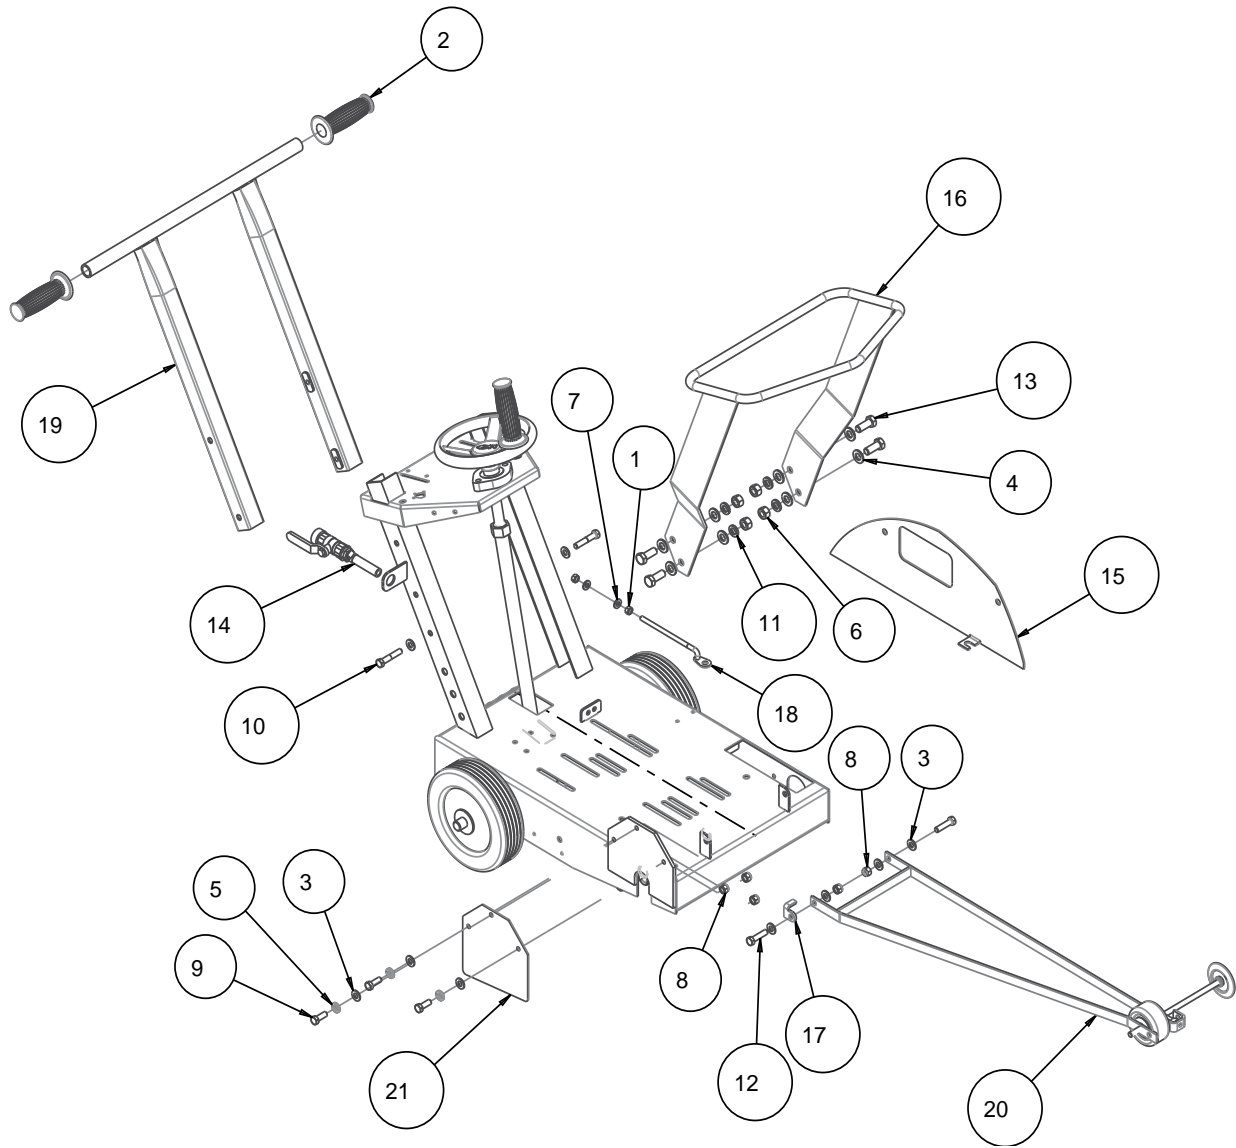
MK-1610 PREMIUM LESS MTR, 18" BG-SS P/N 172432
